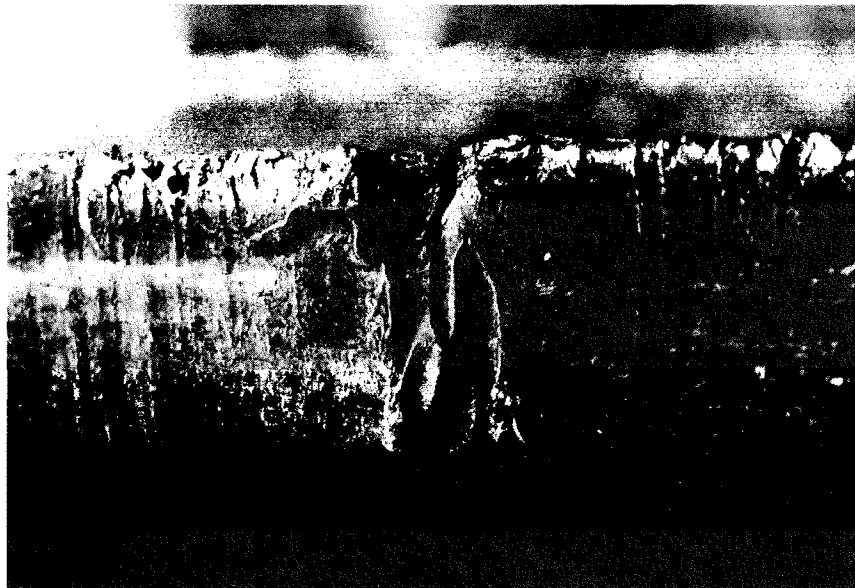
Severe notch at the flame-cut flange-tip of a welded beam
